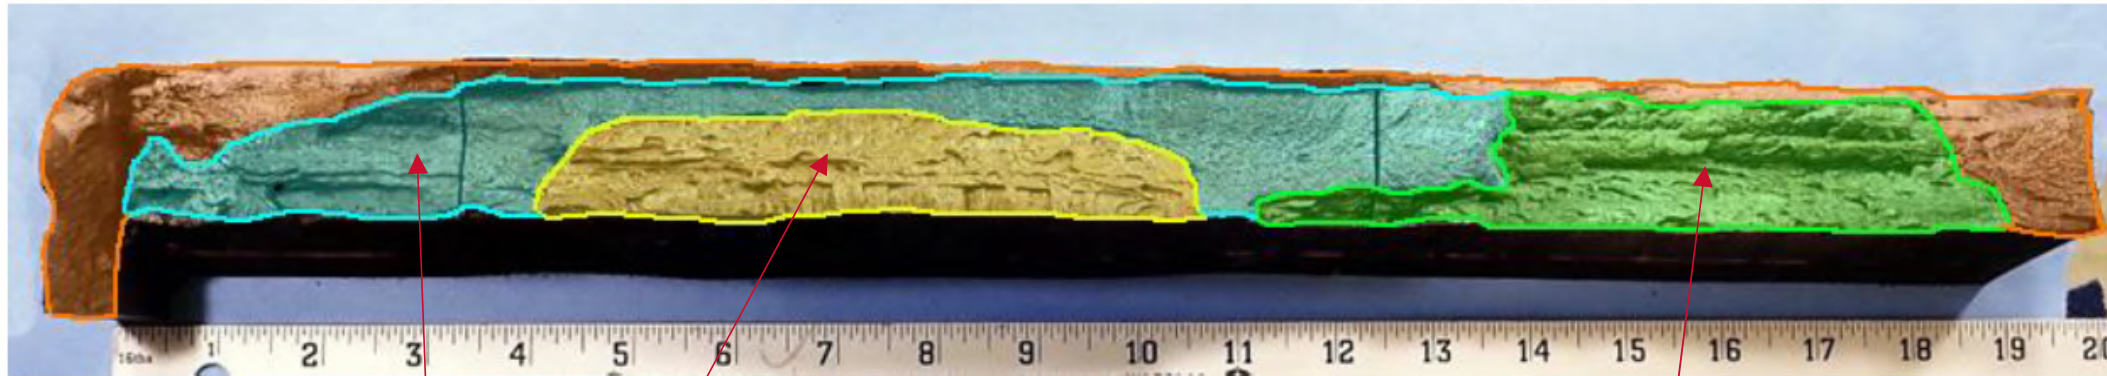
Lower portion of fracture, color-coded to indicate failure sequence.
